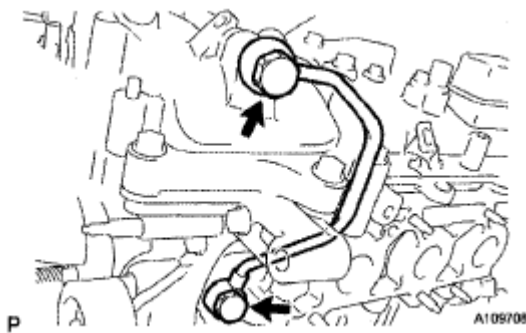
Locating Oil Pipe Unions And Oil Pipe No. 1
